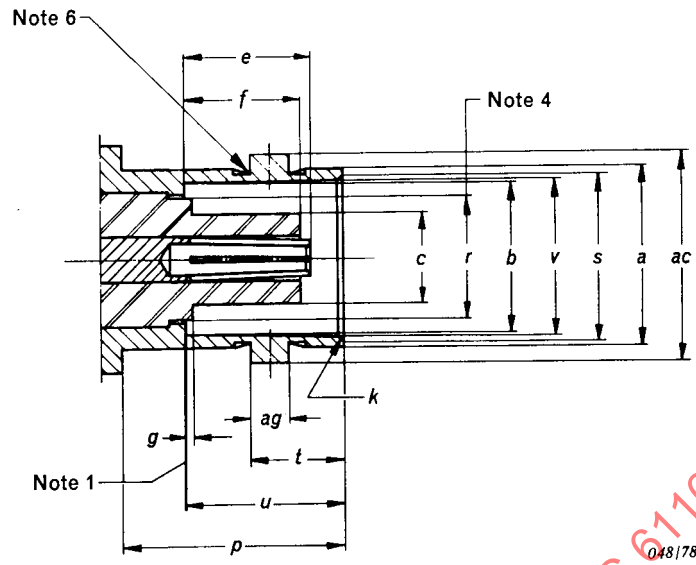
Connector with socket-centre contact (for dimensions, see Table 2)
